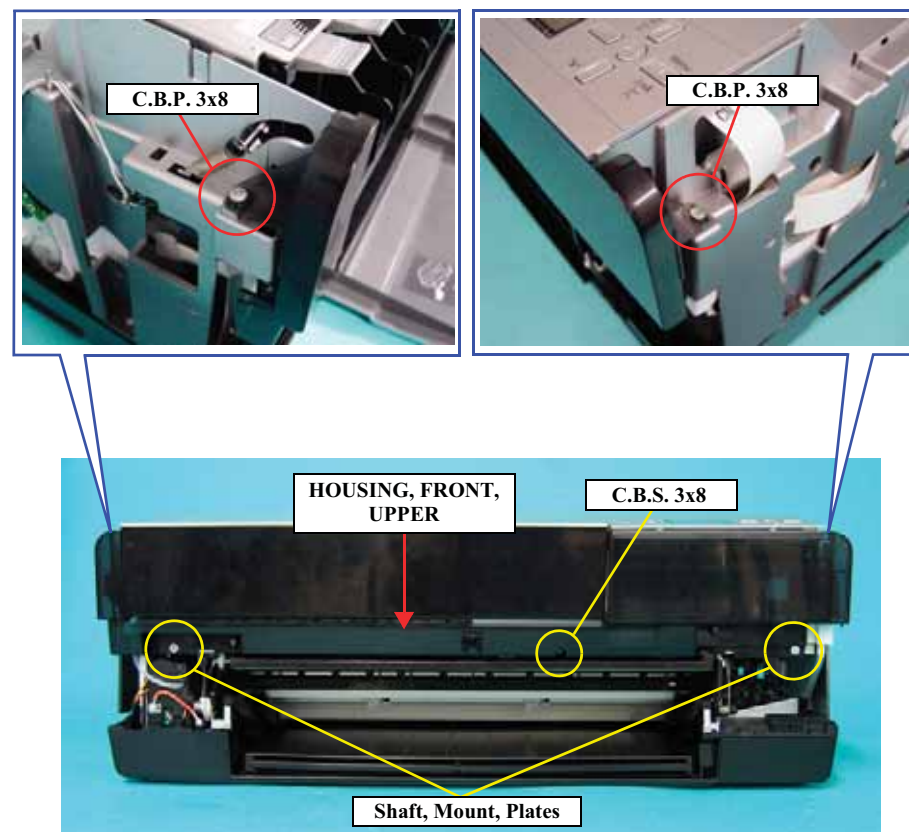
Removing the HOUSING, FRONT, UPPER
